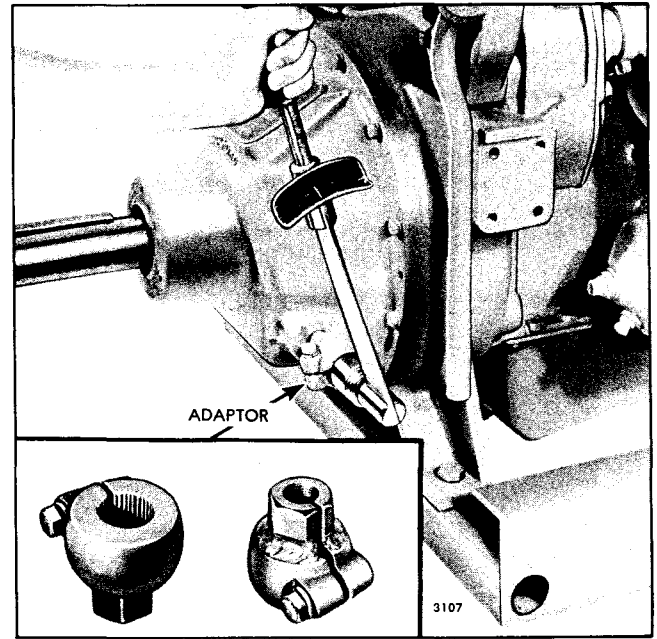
Checking Clutch Adjustment with a Torque Wrench and Adaptor
